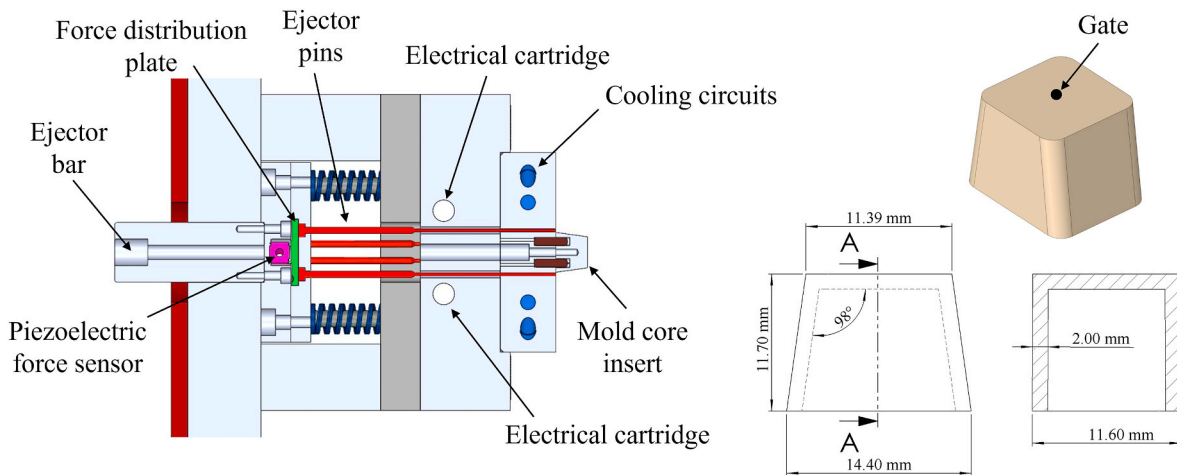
Mold assembly and schematic drawing of the molded sample.
